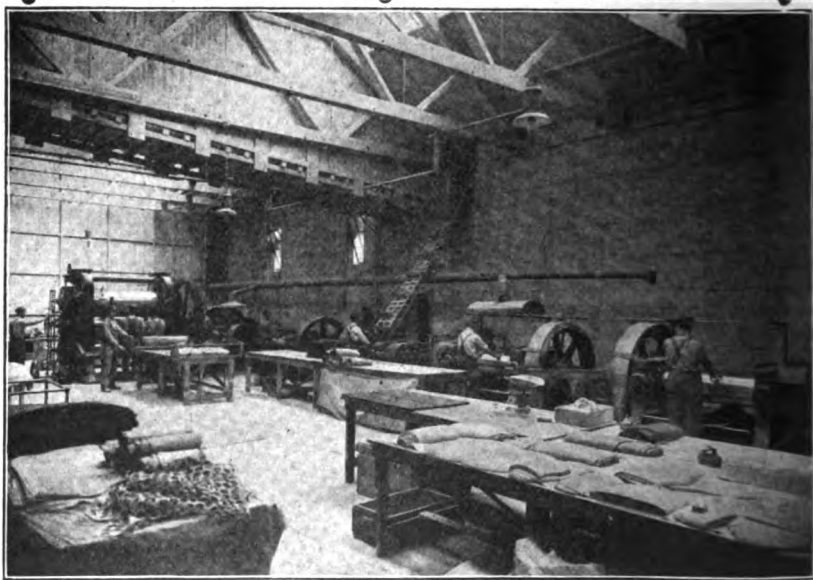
RUBBER MANUFACTURE — MILL AND CALENDER ROOM.
